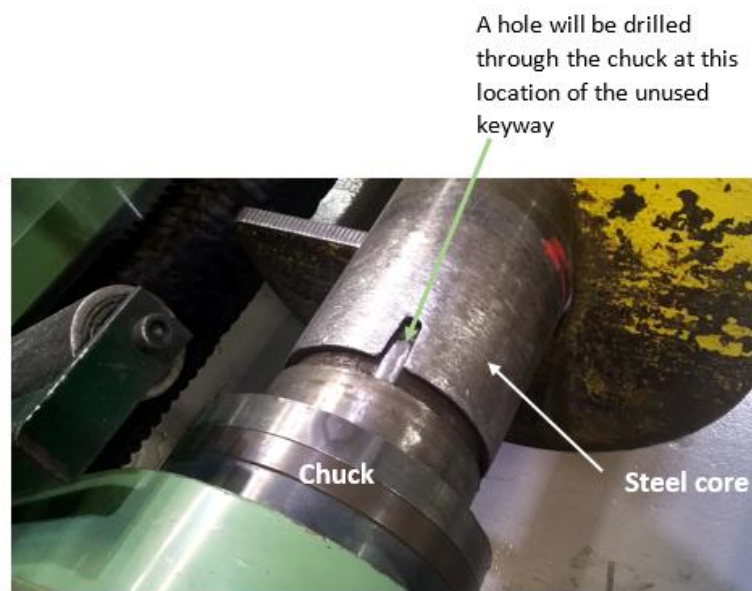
A hole will be drilled into the chuck in the location of the free keyway on the other side of the steel core [6].
